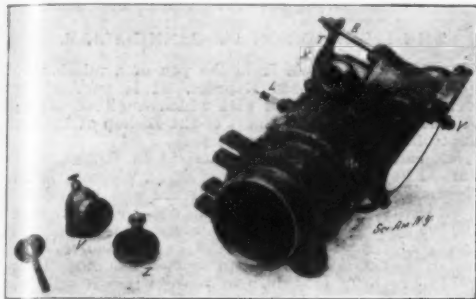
CYLINDER OF RIEGEL MOTOR.
